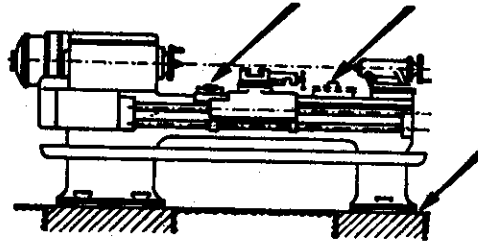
Checking a lathe for horizontal position by means of a spirit level
